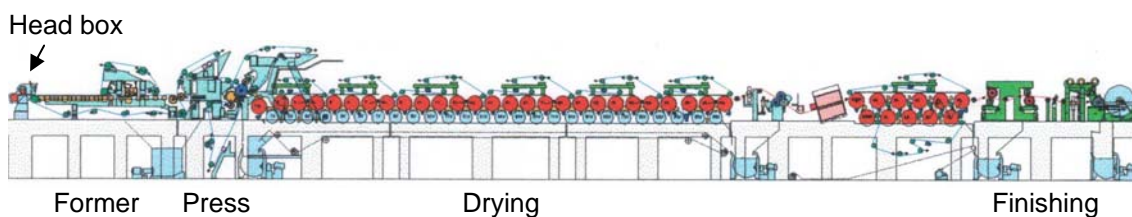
Sections of a paper machine (source Metso Paper Inc., edited by Kalevi Nevala)
